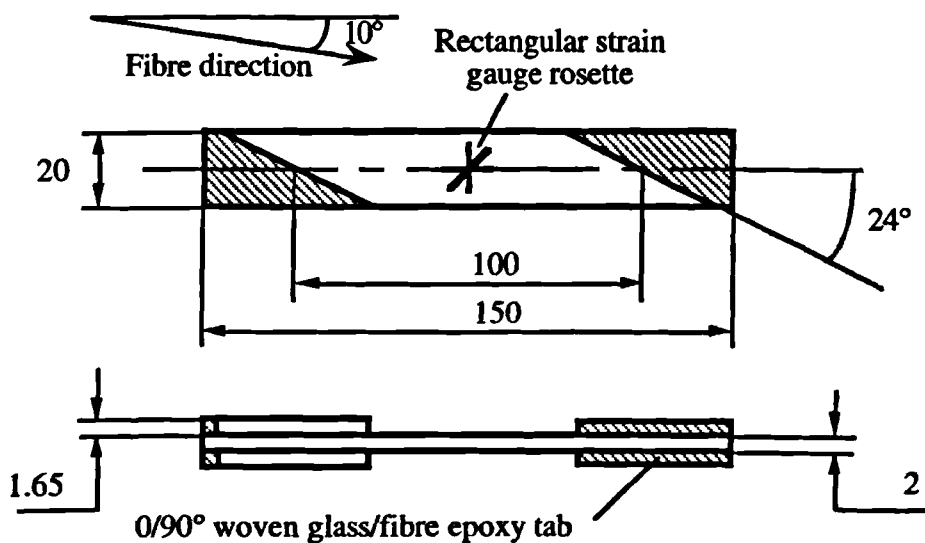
10° off-axis tensile test specimen, dimensions in mm
